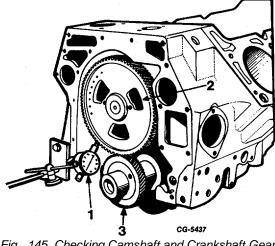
Checking Camshaft and Crankshaft Gear Backlash
